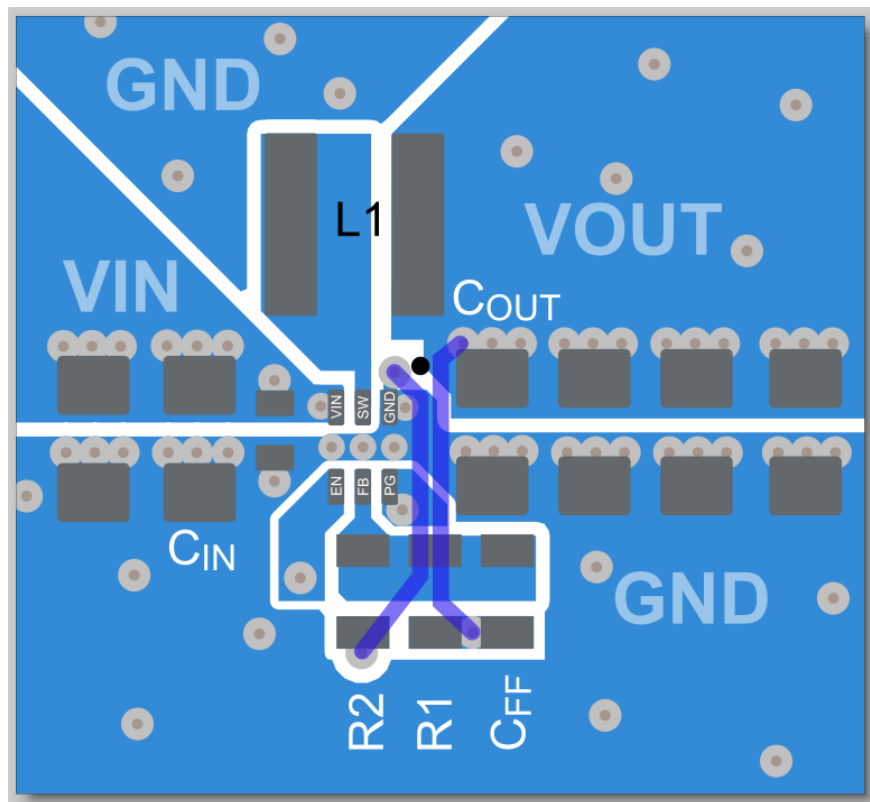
TPS62A04xB PCB Layout Recommendation
